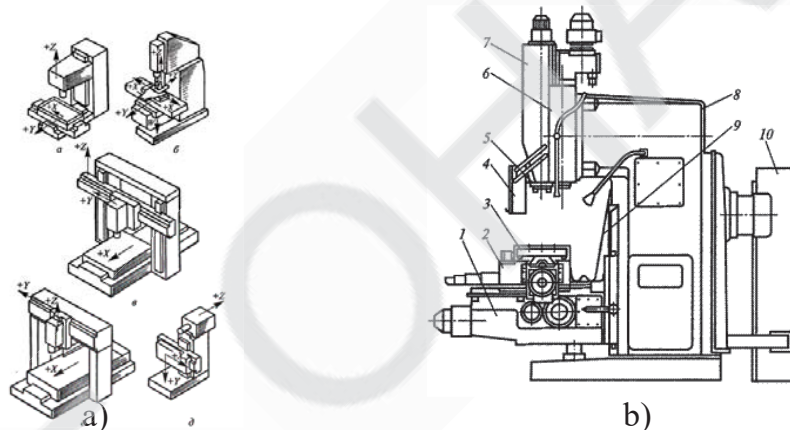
a) Arrangements of CNC milling machines b) CNC milling machine: 3– table; 5–spindle; 6– milling headstock; 8– bed
